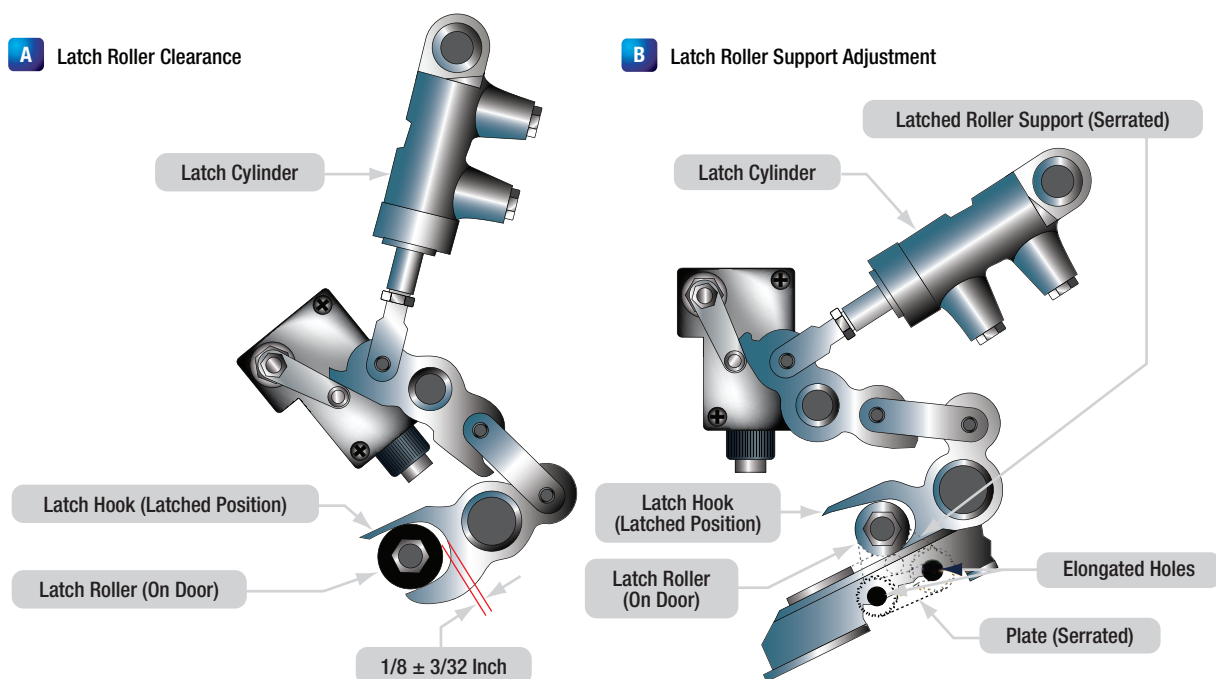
Main landing gear door latch roller clearance measurement and adjustment.
